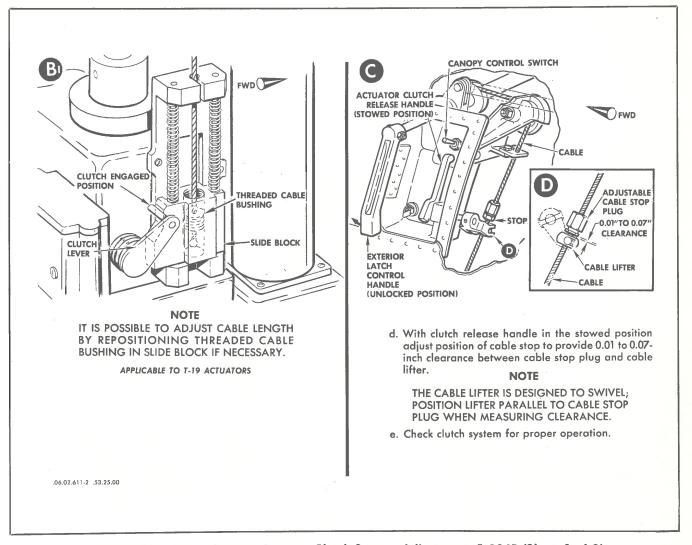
Electric Canopy Actuator Clutch System Adjustment, F-106B (Sheet 2 of 2)
